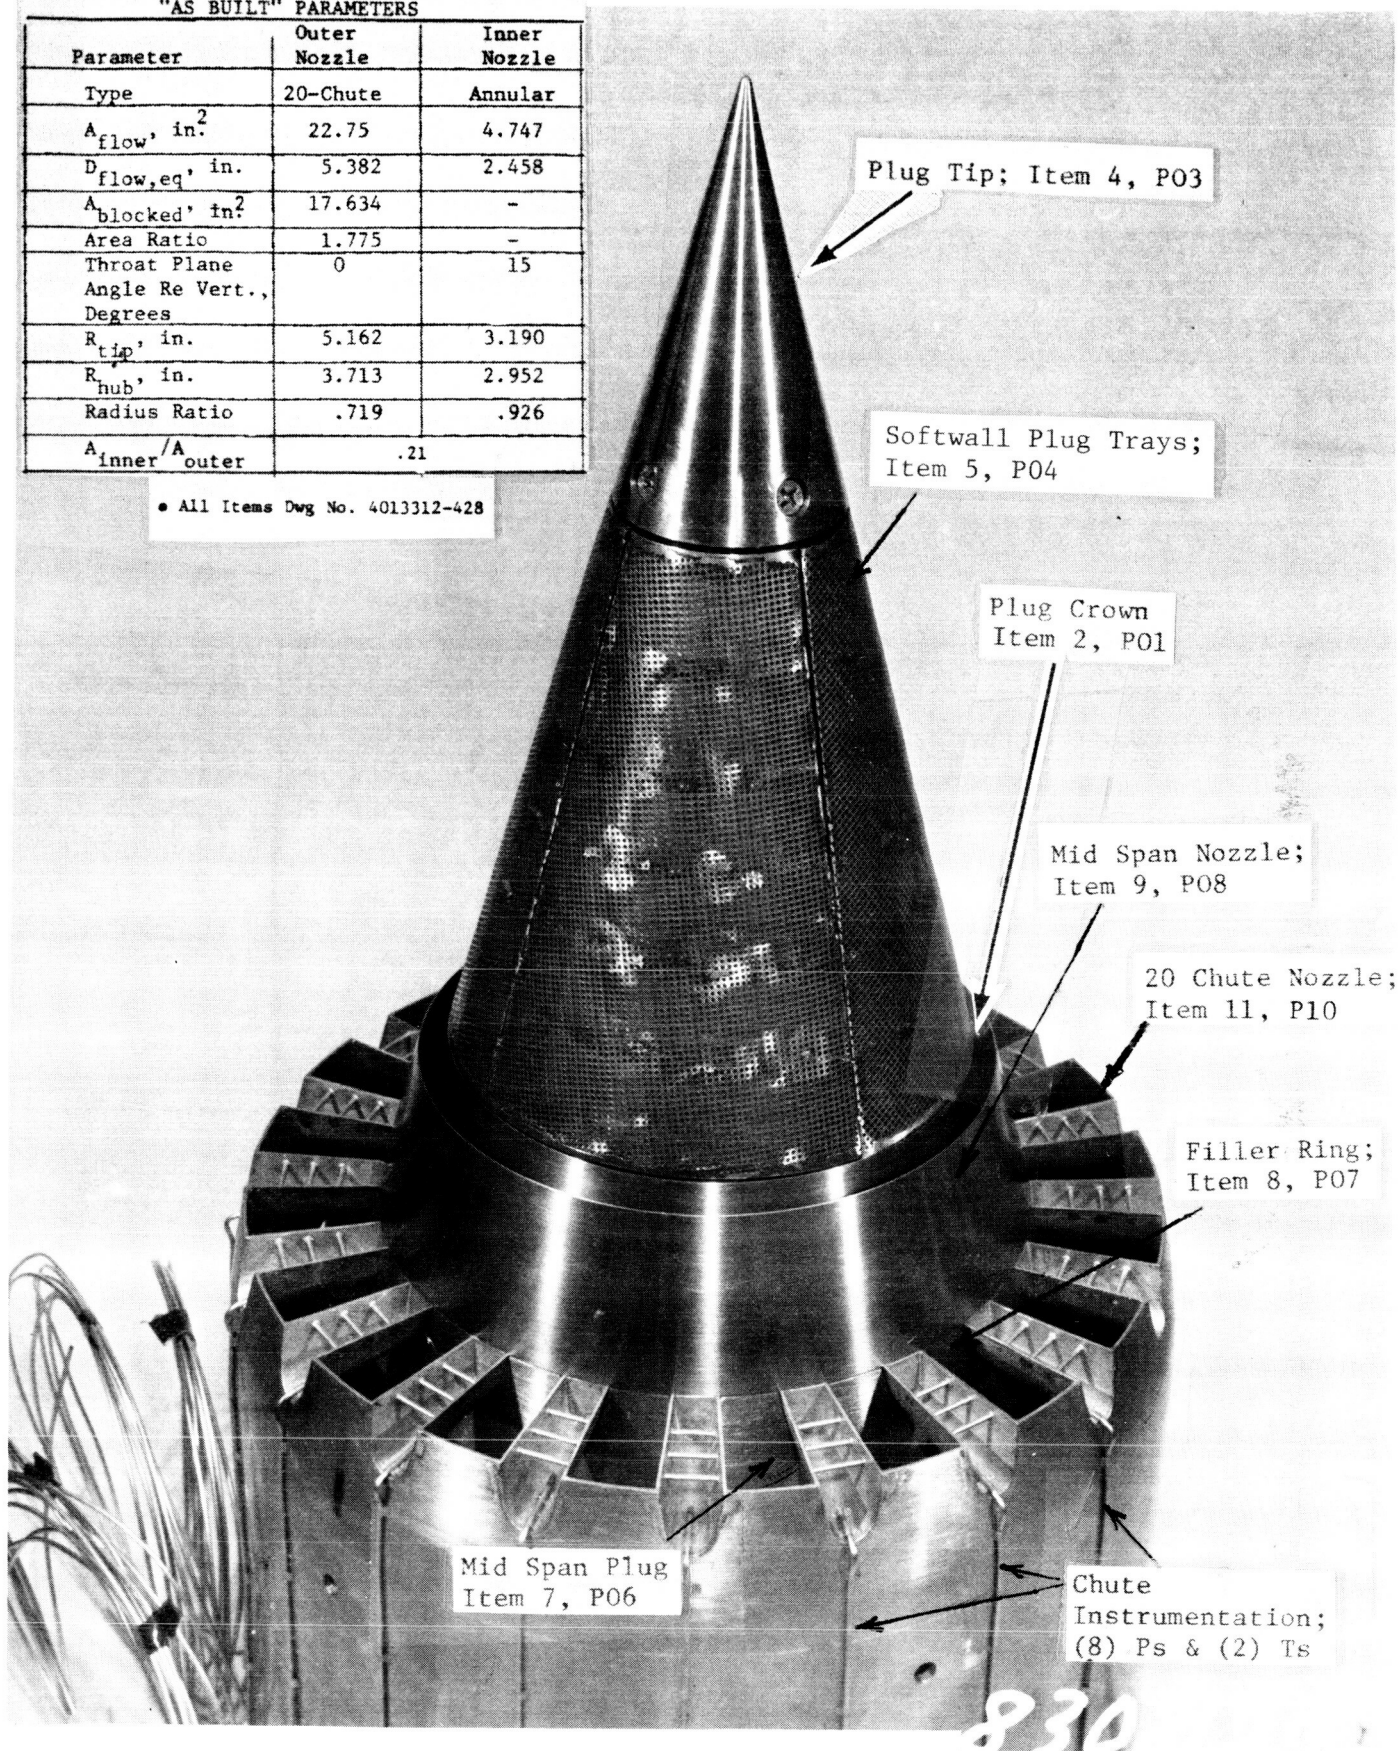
CONFIGURATION TE-6 ASSEMBLY DETAILS
